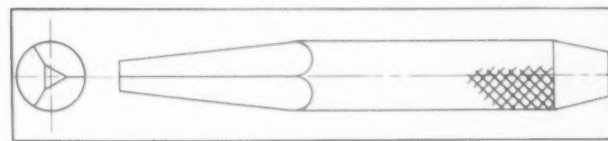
Center punches for stainless steel should not have the conventional conical point; instead, should have a triangular point flattened on the end, as shown.
